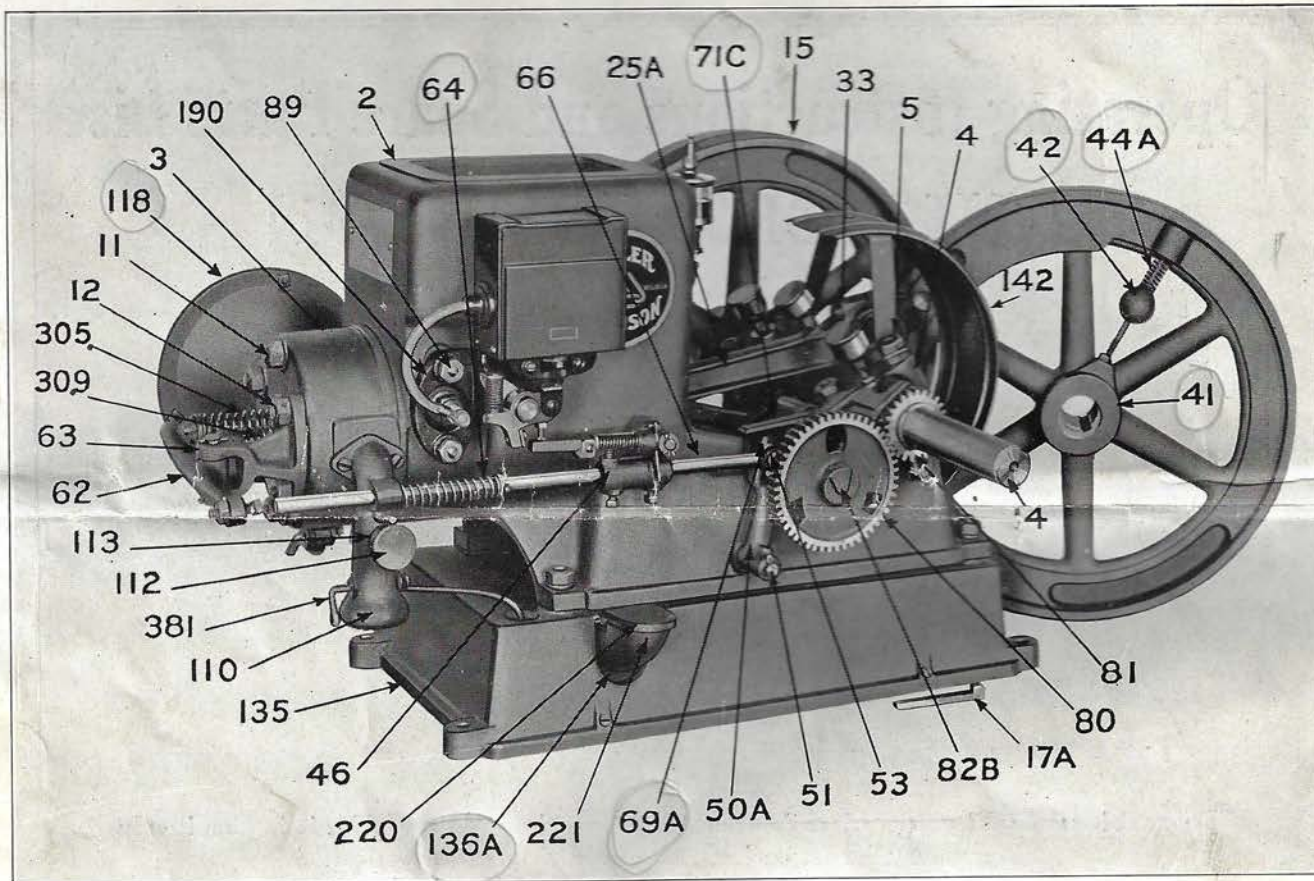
3 1/2 H. P. Model "NC" Engine showing parts
